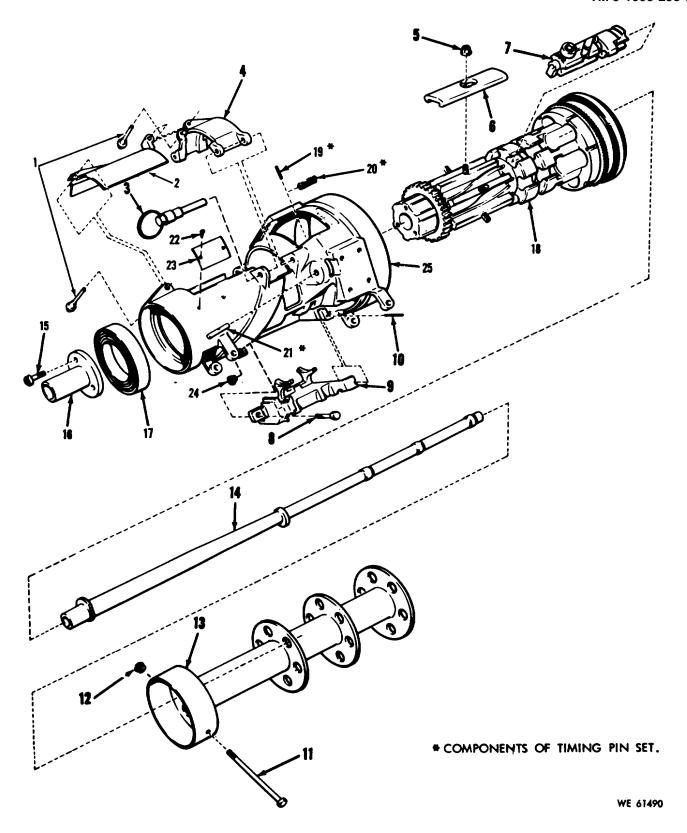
7.62 Millimeter machine gun M134 exploded view.
